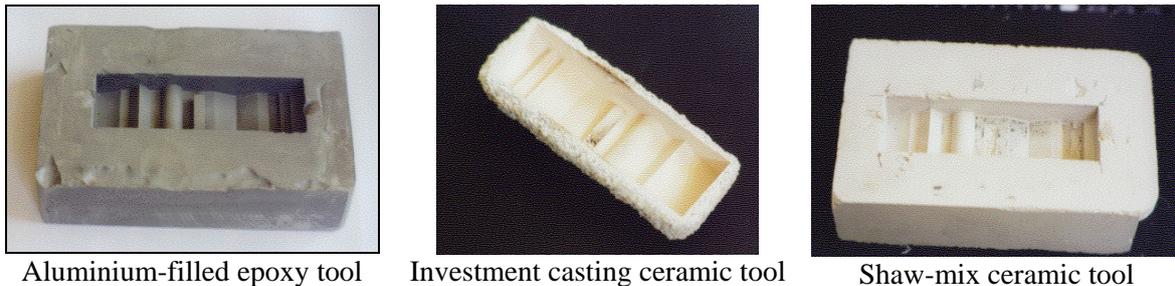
Intermediate tools for making master patterns using arc metal spray technology.
